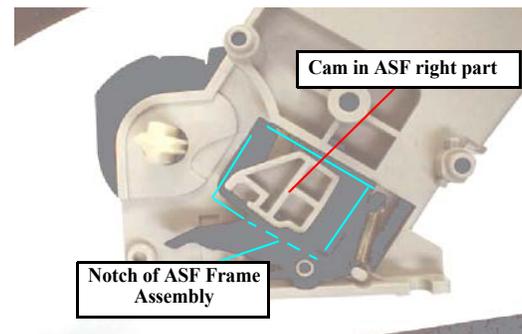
ASF Hopper Assembly Cam Matching Position
